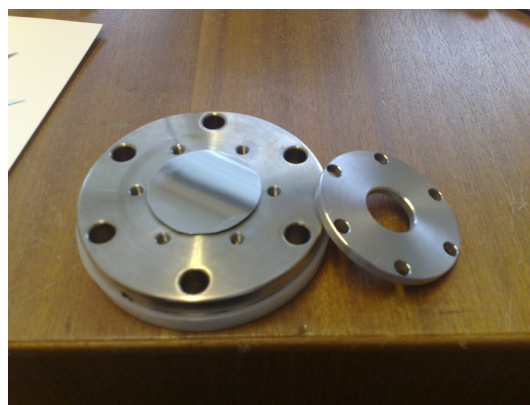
Aluminised Mylar 'window' cut and ready to be mounted. Note – Al coating on the outside for earthing purposes.
